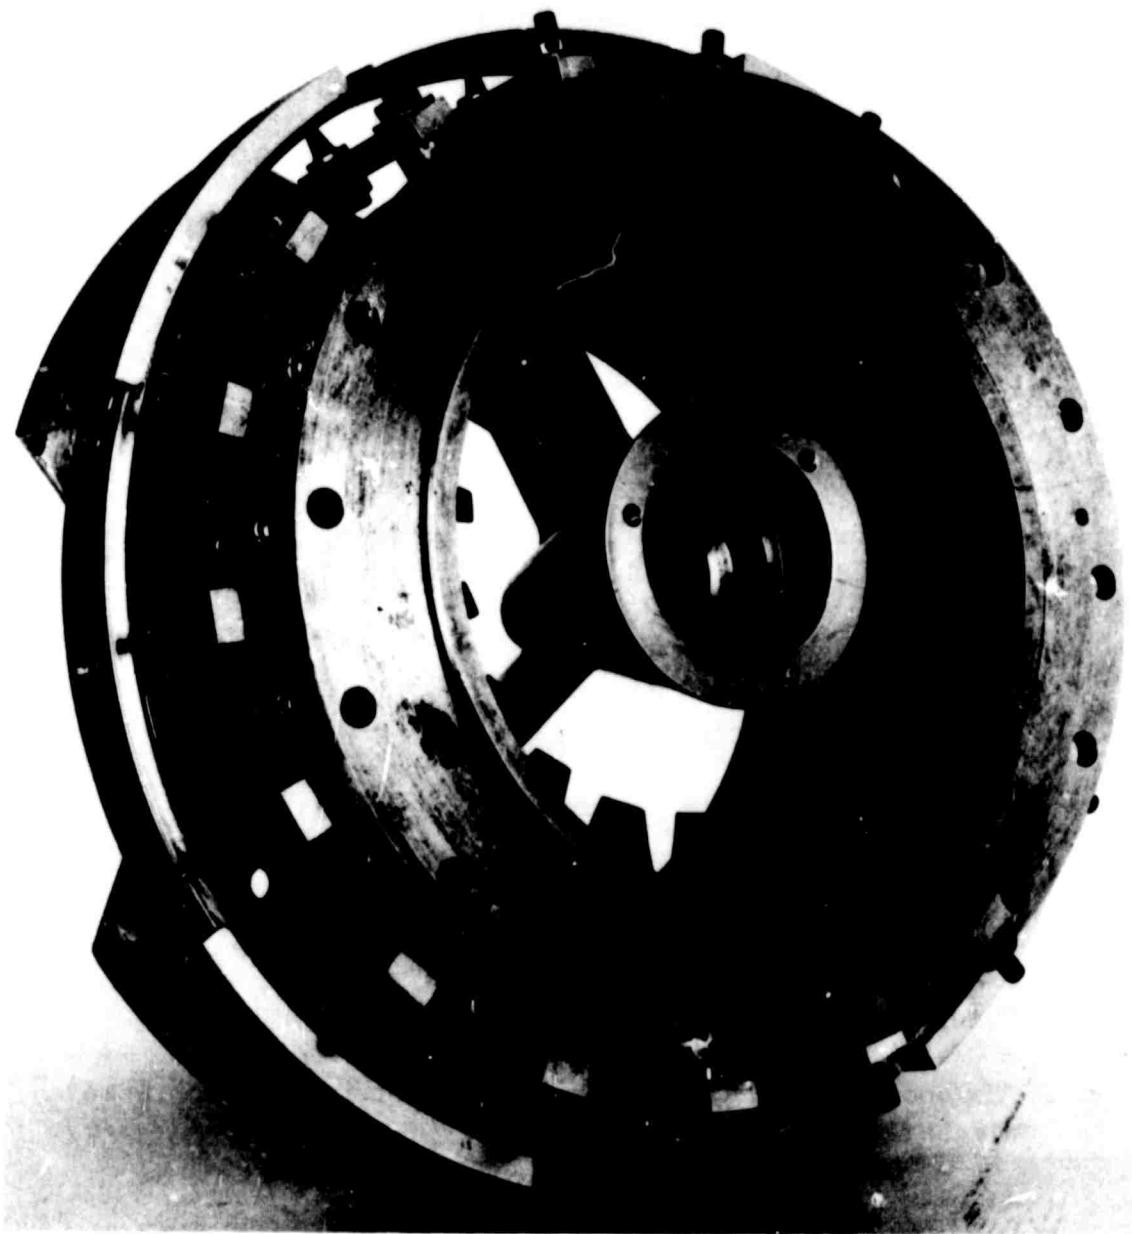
Redesigned Variable Inlet Guide Vane Assembly.
